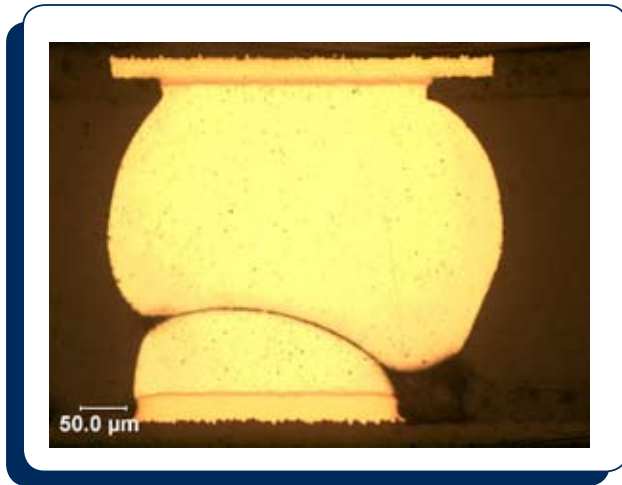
"Head and Pillow" non-wetting between solder paste and solder ball.
